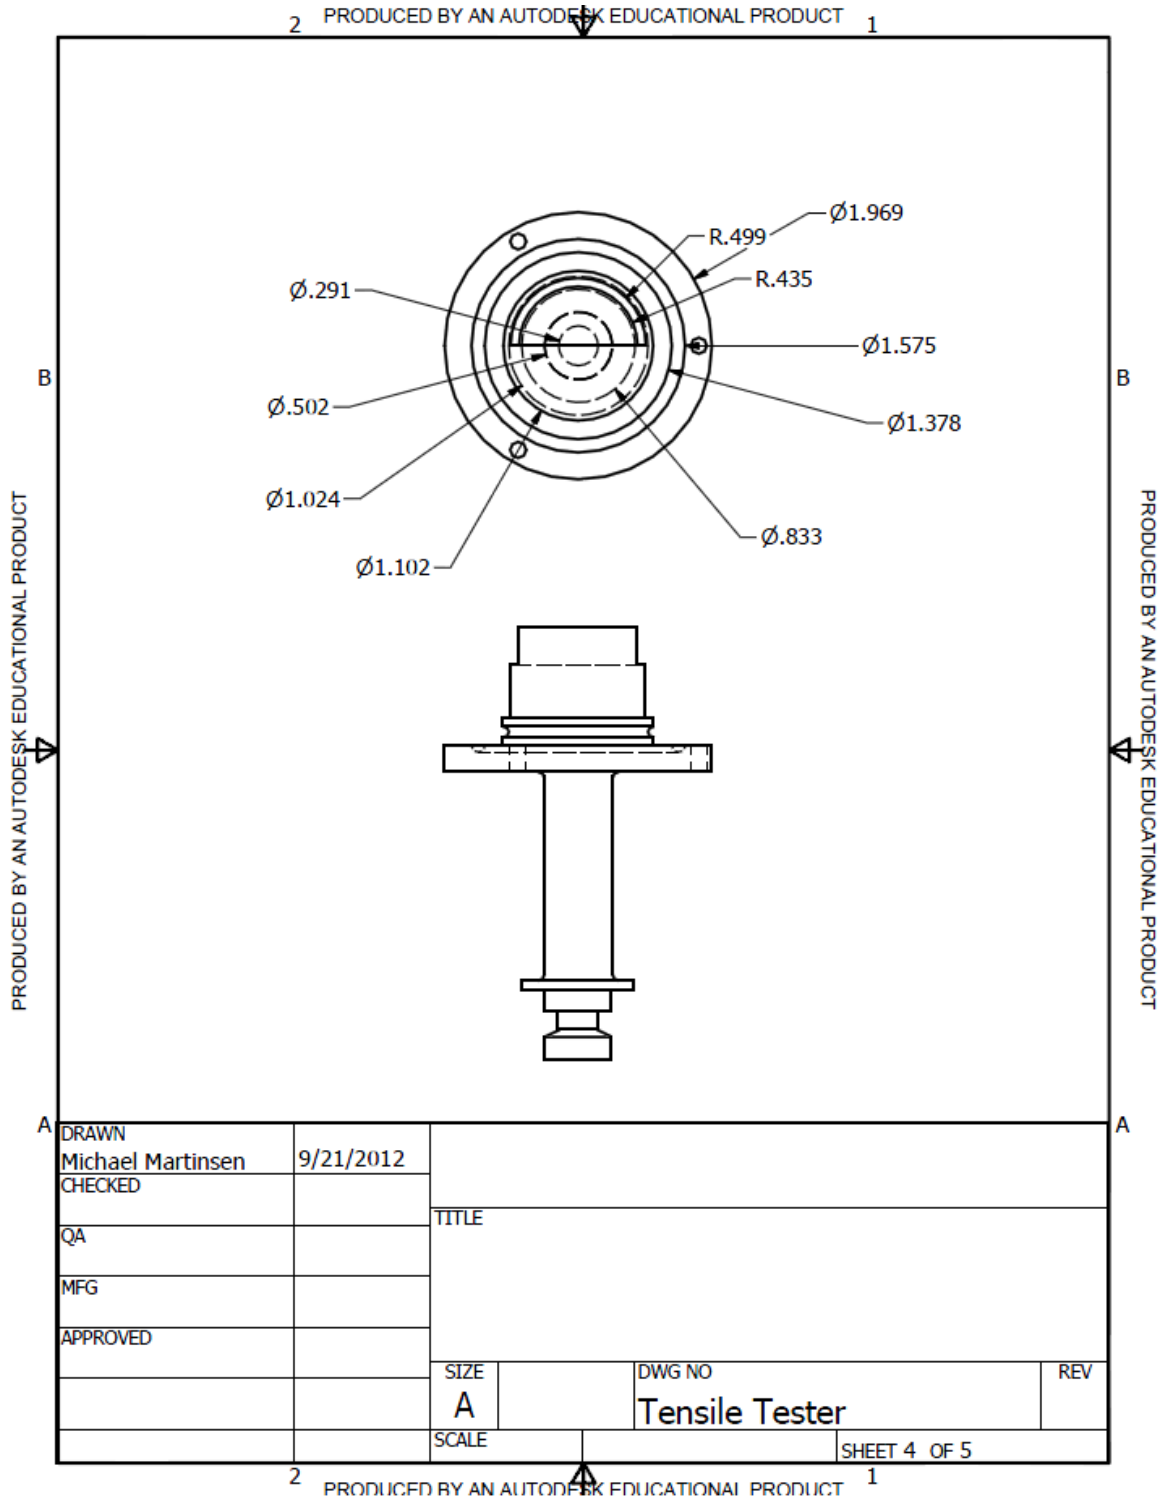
ENGINEERING DRAWING TENSILE TESTER (TOP VIEW)
